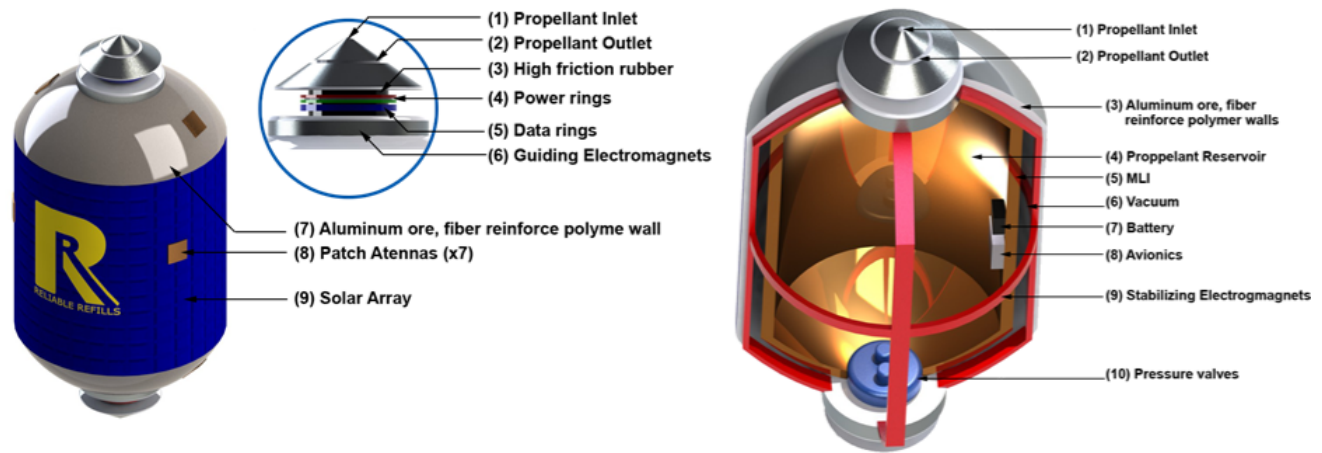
Isometric and cross sectional views of cartridge with detailed docking interface
